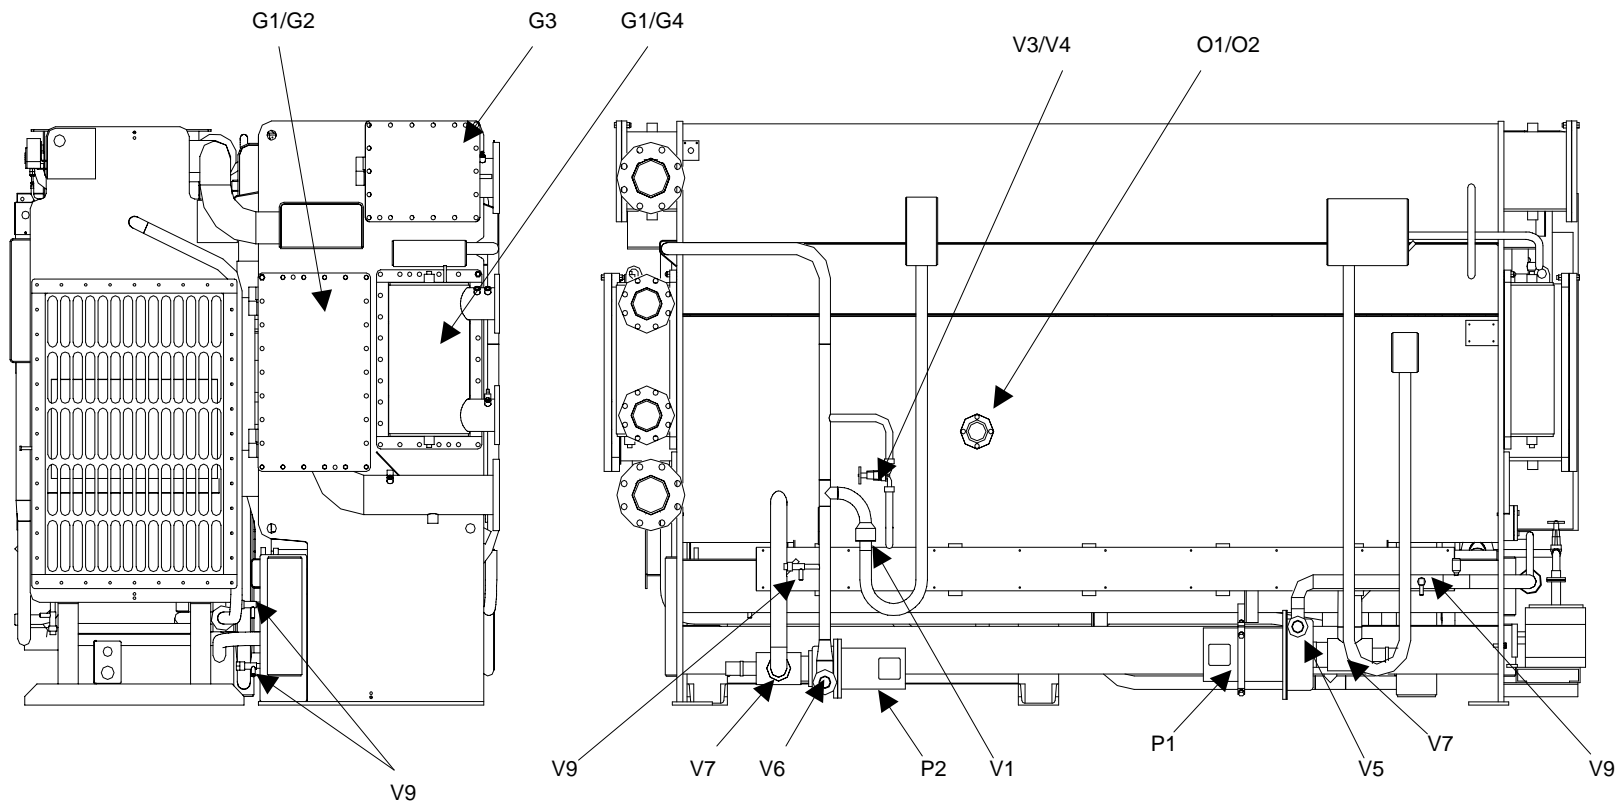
Valve and Components Location, Rear and Side Views (16DNP012 Smoke tube type chiller)
